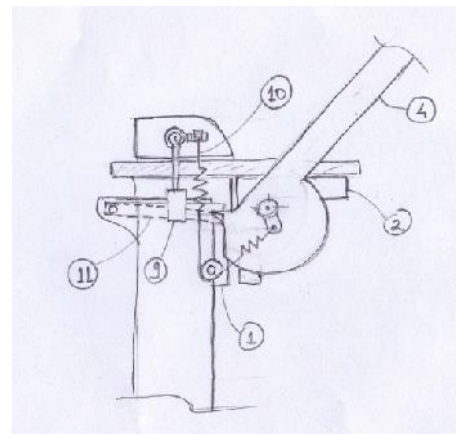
Regular bending mechanism of plate consist of four basic steps, i.e. inserting (1), clamping (2), bending (3) and releasing specimen (4). To increase rate of production this work proposed a mechanism to combine clamping and bending in one action.
